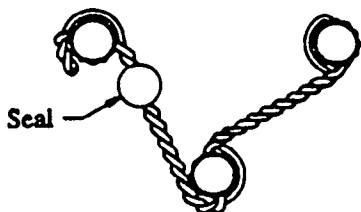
Method for attaching seal to protect critical adjustments.
